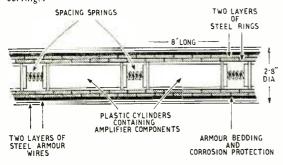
Longitudinal section showing construction of American-type flexible repeater built into the main transatlantic run of the cable.
